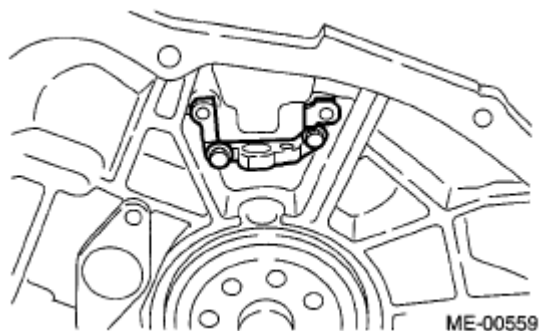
Identifying Crankshaft Position Sensor Bracket
